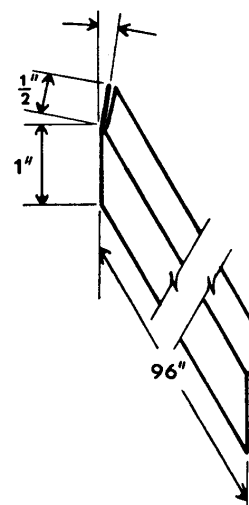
OUTER COVER ATTACHMENT STRIP
